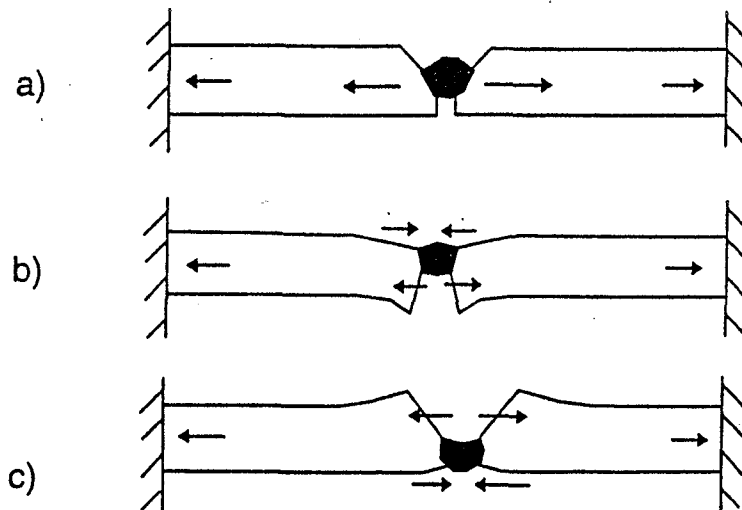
Effect of weld eccentricity on bending moment and local stress at weld root face (a) Tekken test (b) Lehigh test (c) WIC test [12].
